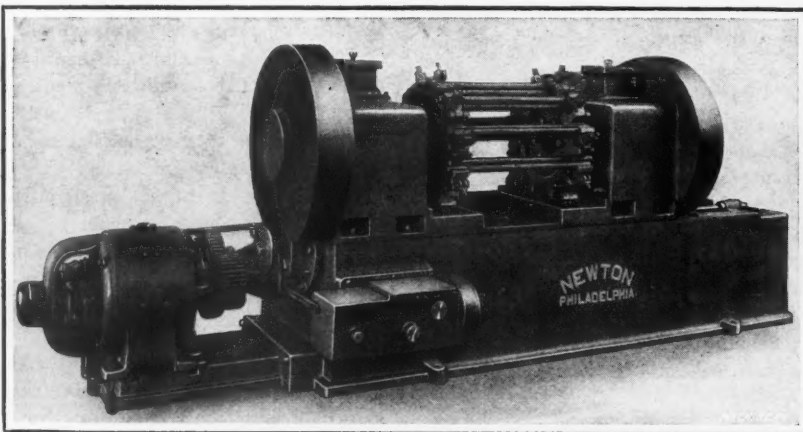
Newton Model 0-3 Continuous Milling Machine
